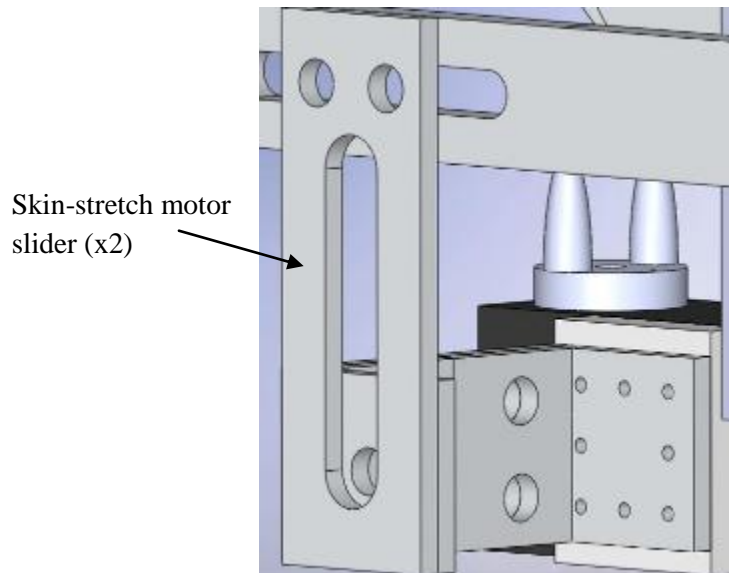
Skin-stretch motor slider used for the Skin-Stretch Assembly
